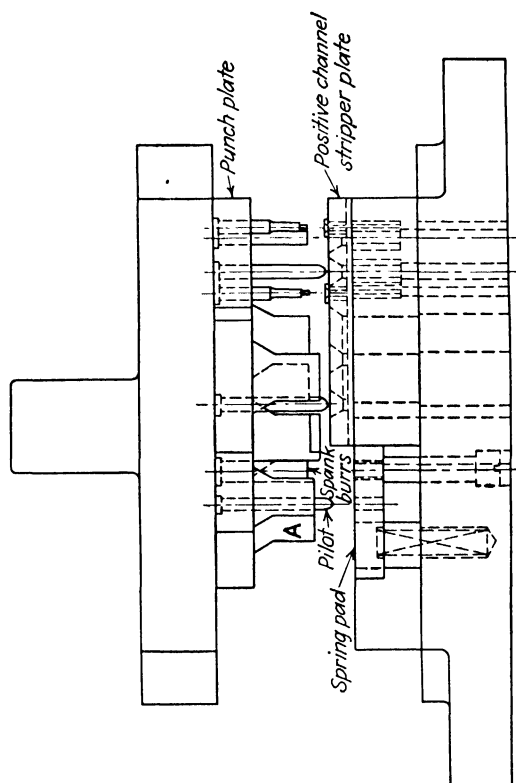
Design of a high-speed progressive die used in fabricating the brass terminal shown in Fig. 80.
